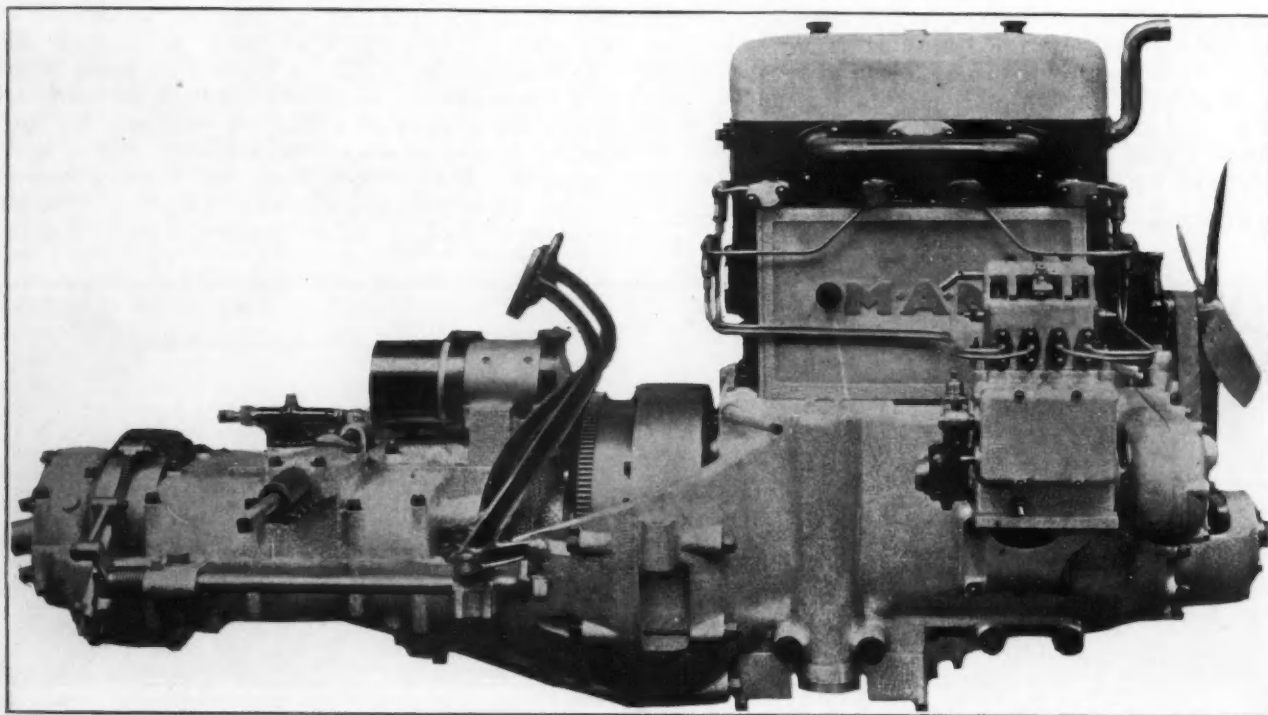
THE M.A.N. MOTOR-TRUCK ENGINE
